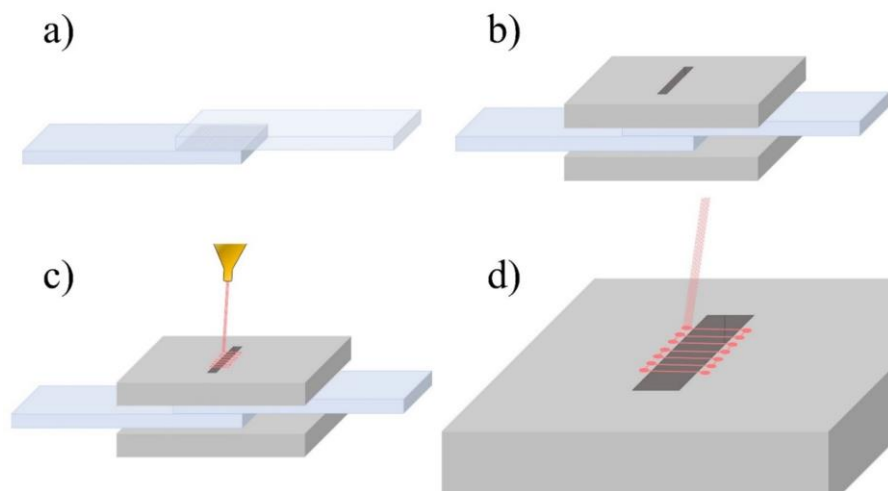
a) Overlap of two polymer specimens prior to welding, b) clamping of the overlapped specimens between the plate of the compression tool, c) laser welding process through a machined slot to form 1 welding area and d) a detail of the laser path.
